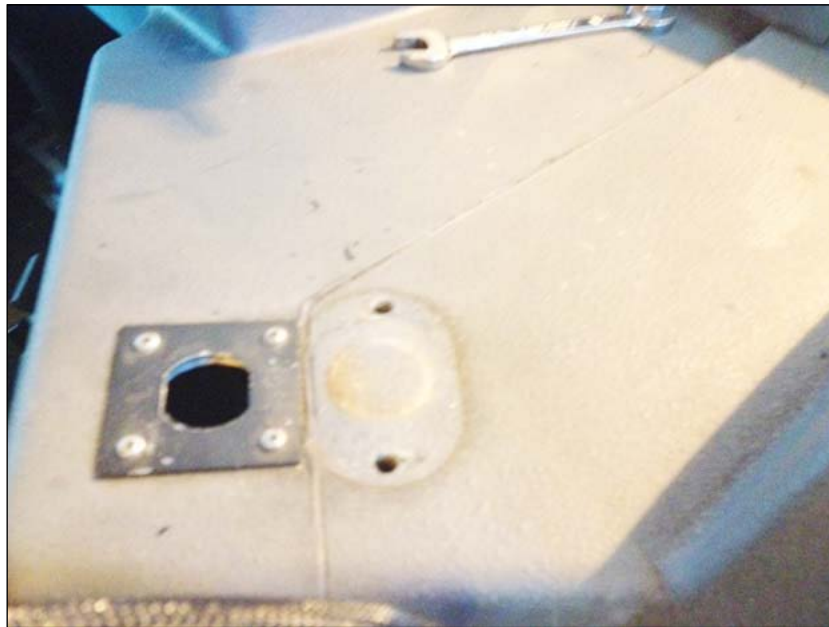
Remove Transfer Ticket Holder and NTP Wiring
